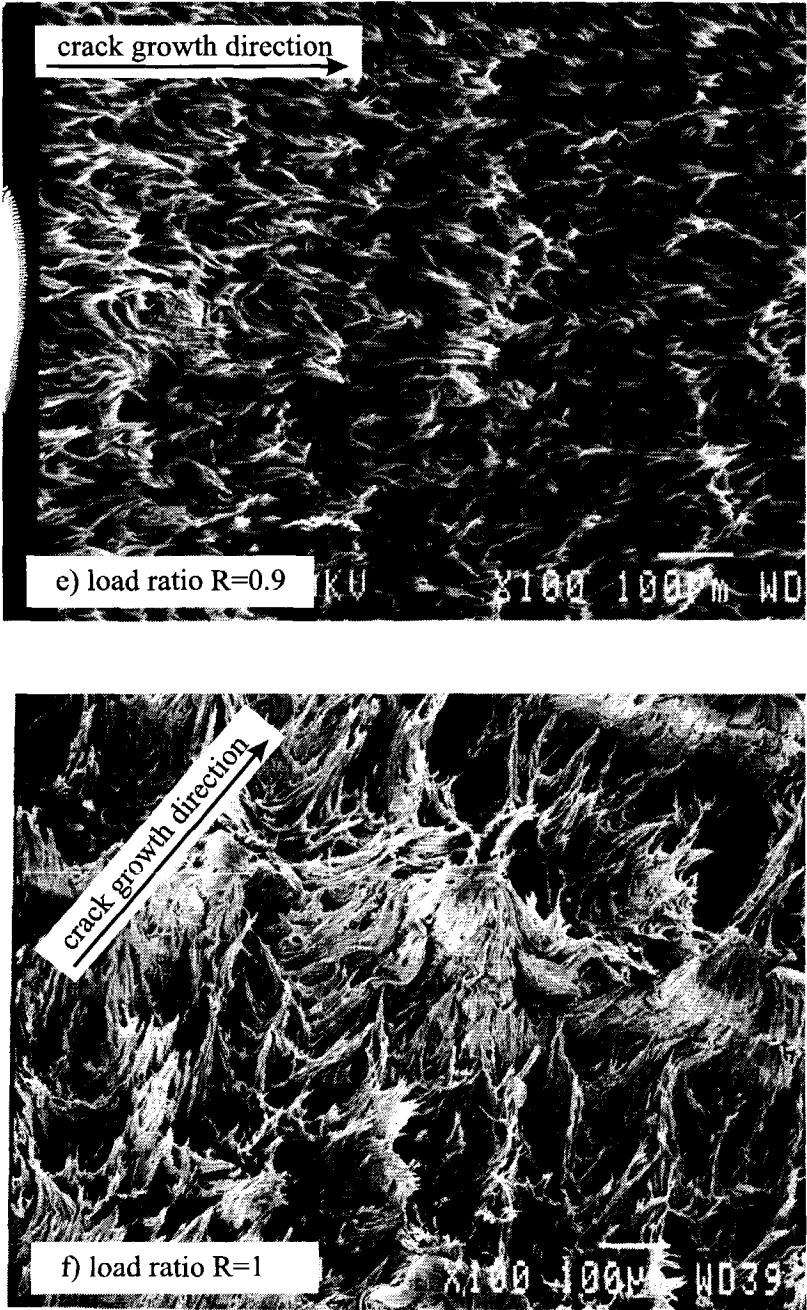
Fracture surfaces of extrapolation load series specimens of material O (continued).
